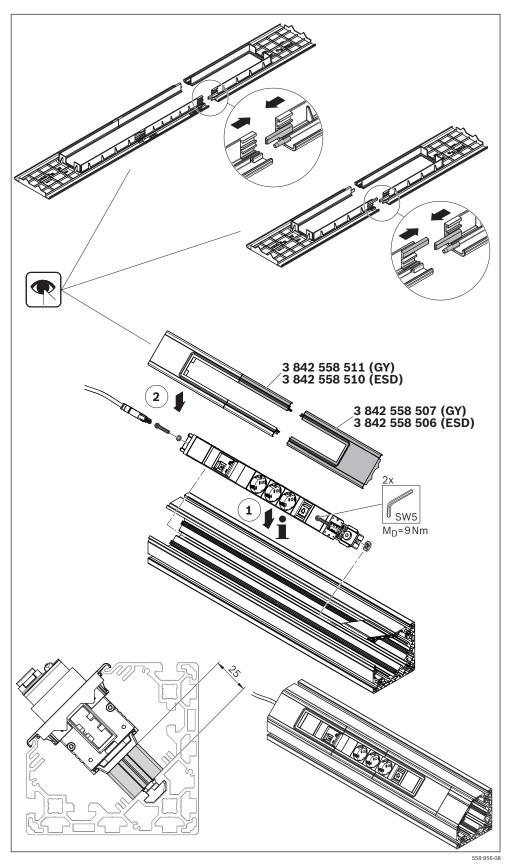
Socket strip and cover in cable guide profile 40x120x120
